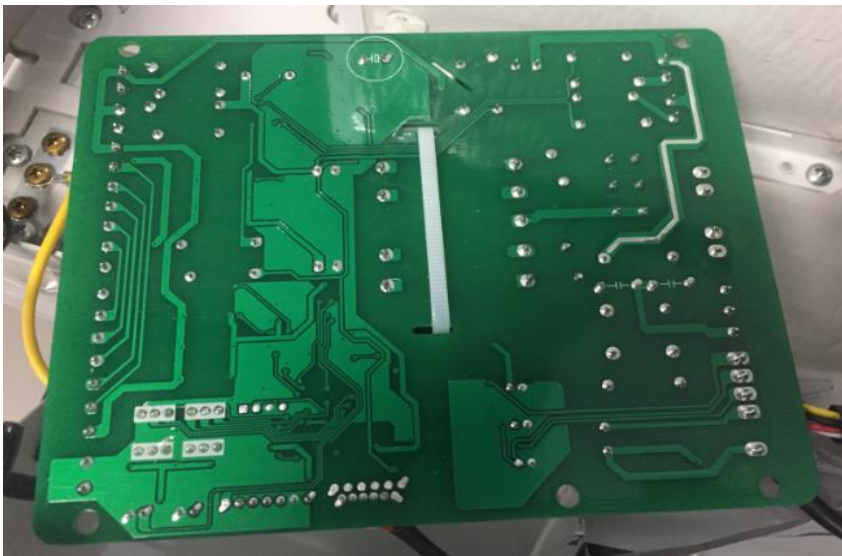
Unlisted Component Fan Motor ZWR15-A56.
